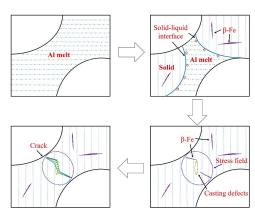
Sketches of crack initiation during casting in position 1
